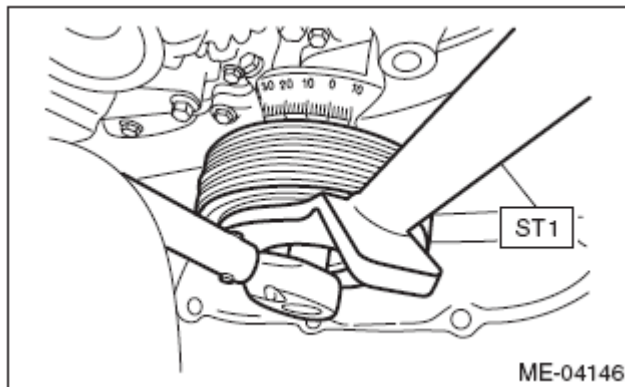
Locking Crank Pulley Using Crank Pulley Wrench
